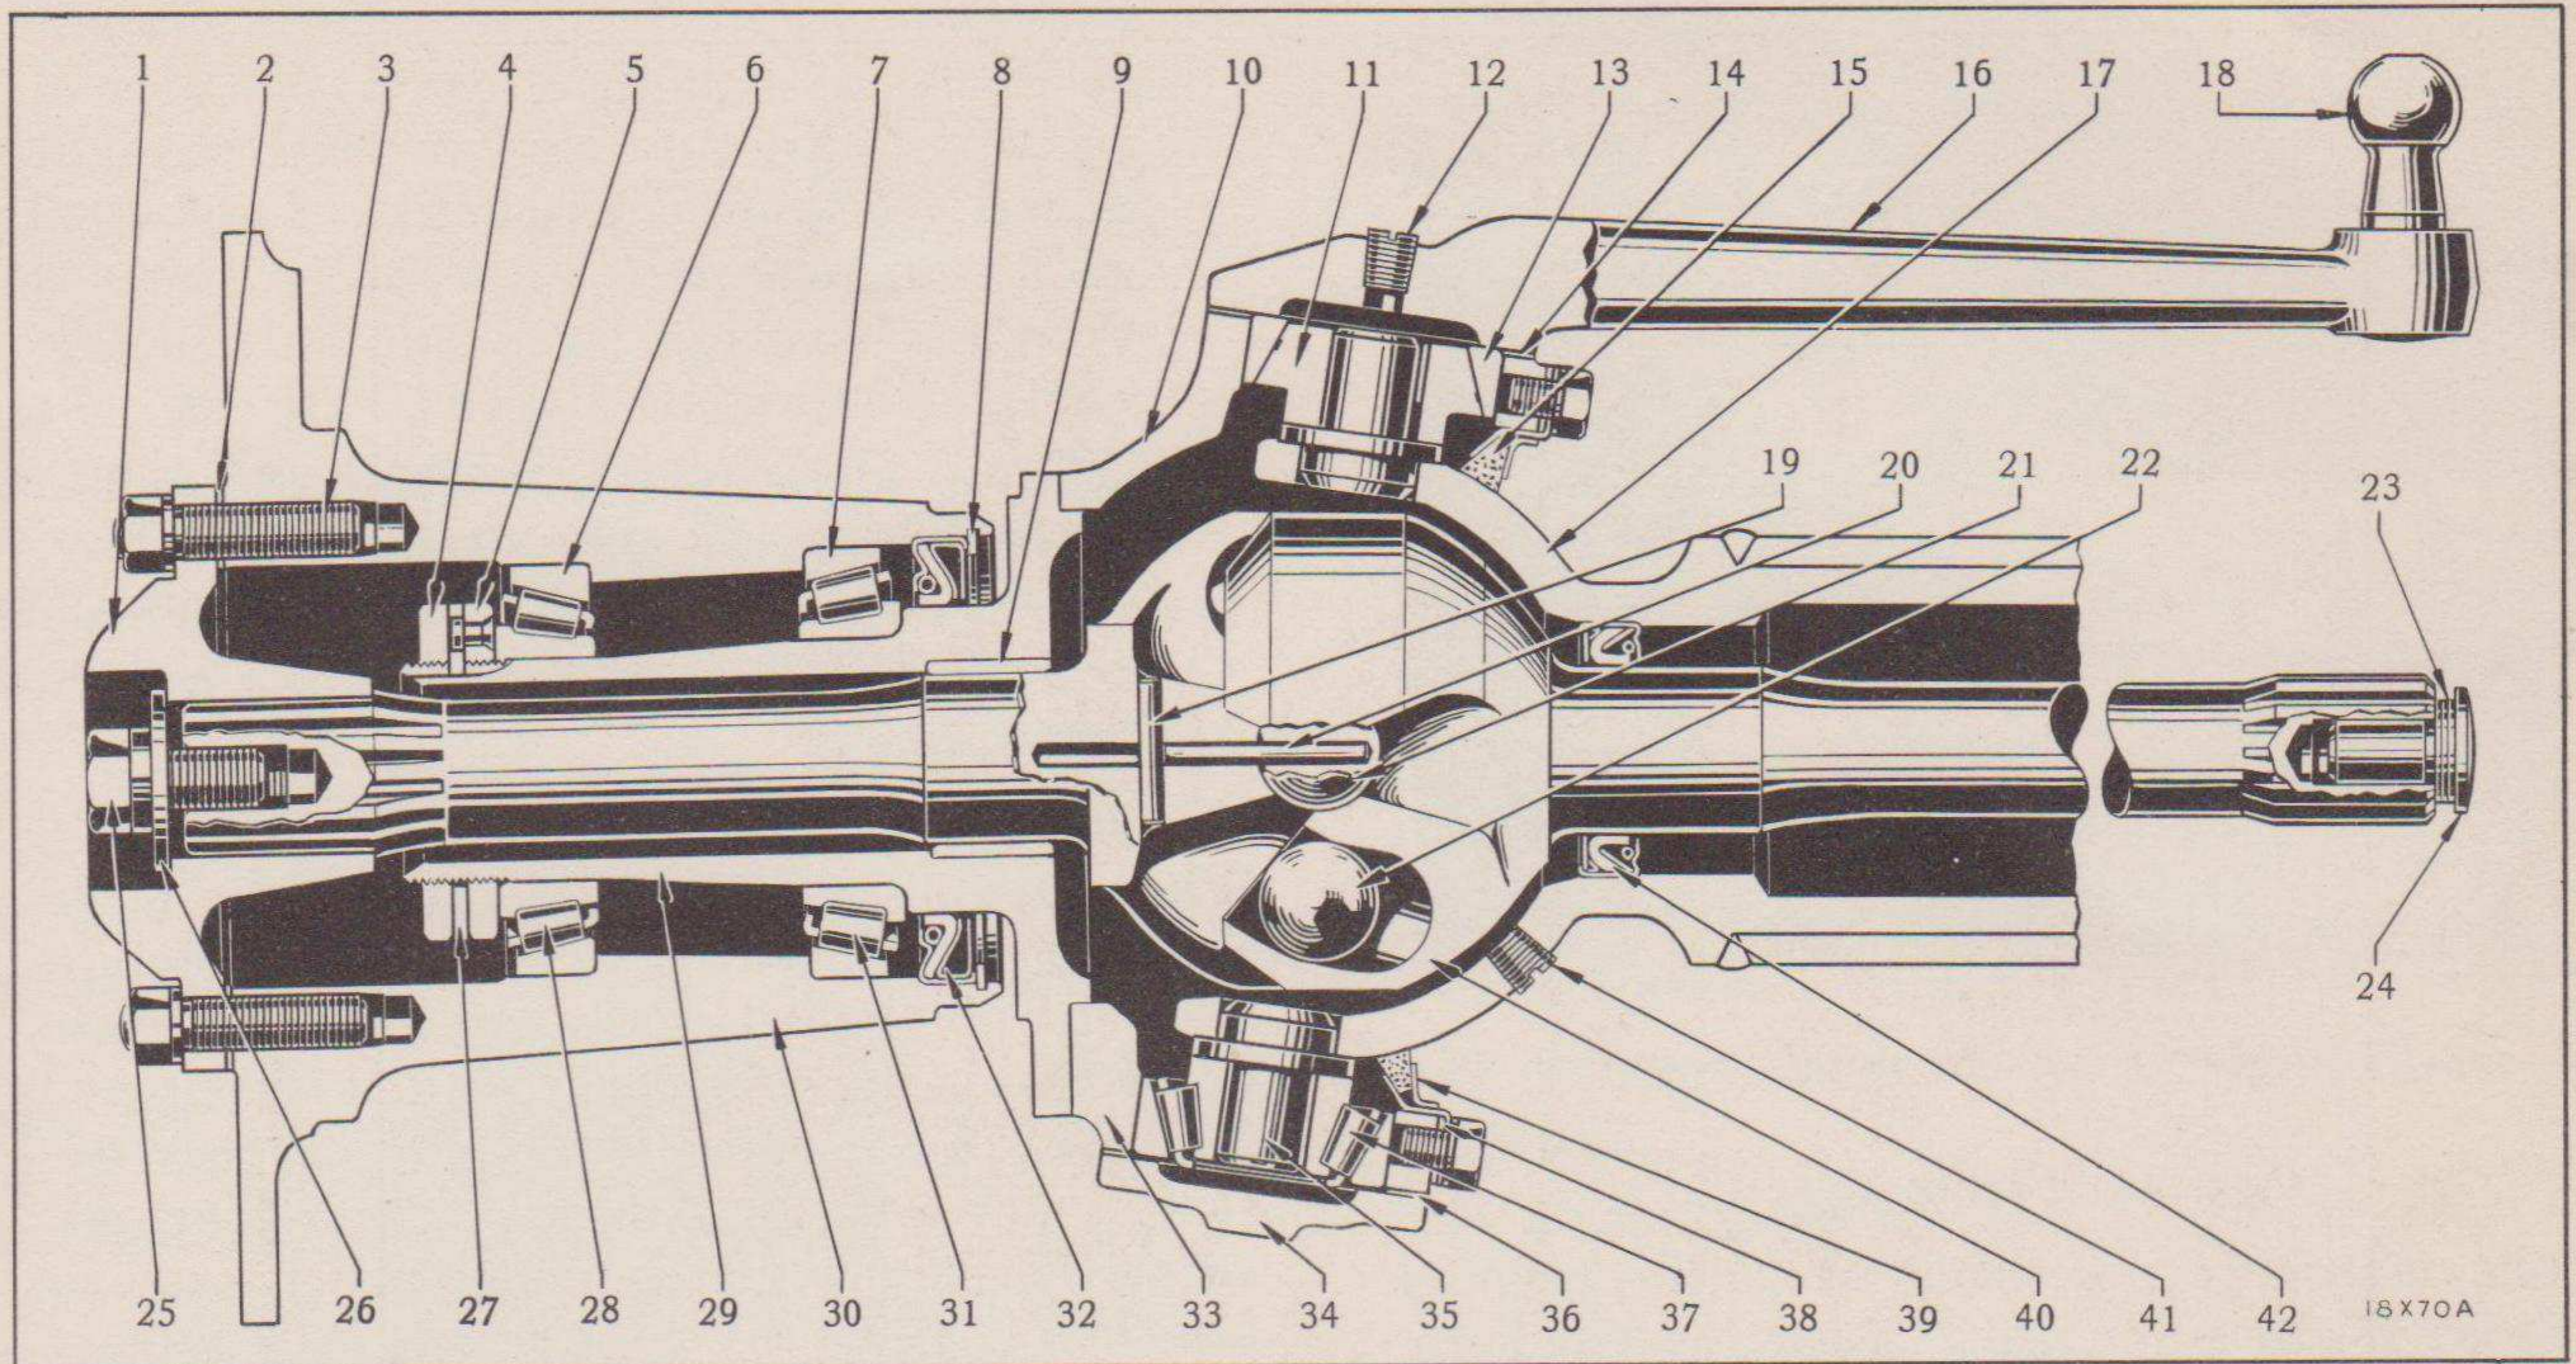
Front Axle with Bendix-Weiss Universal Drive (assembled view)
